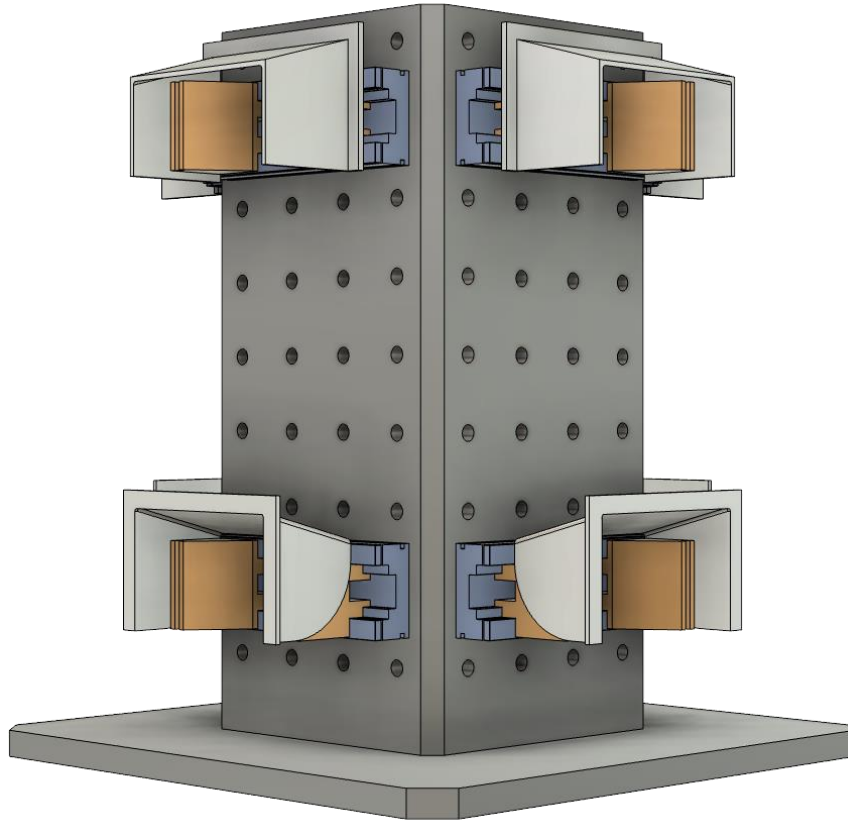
Pallet loaded with workpieces (Autodesk Fusion 360)
